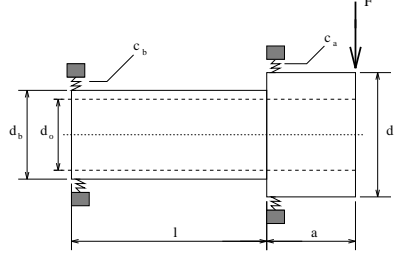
Fig. 1 Sketch of the machine tool spindle used for the example.
